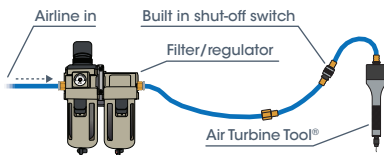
A clean airline from a filter/regulator to an Air Turbine hand tool.
